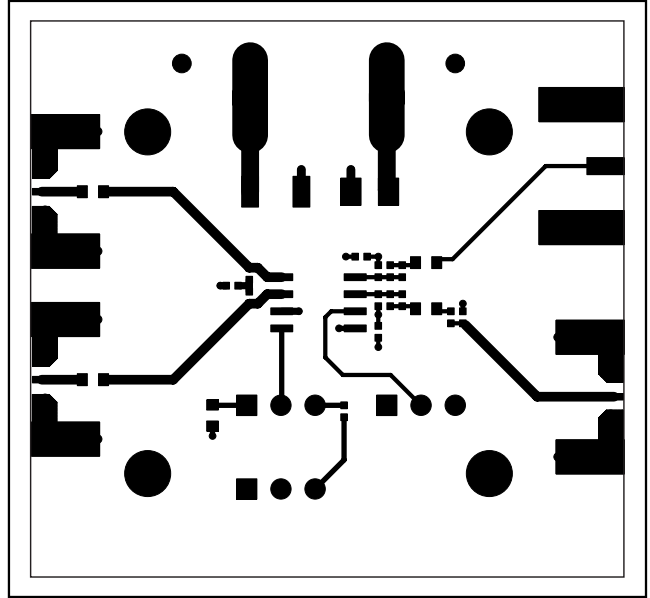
MAX3812 EV Kit PC Board Layout—Component Side
